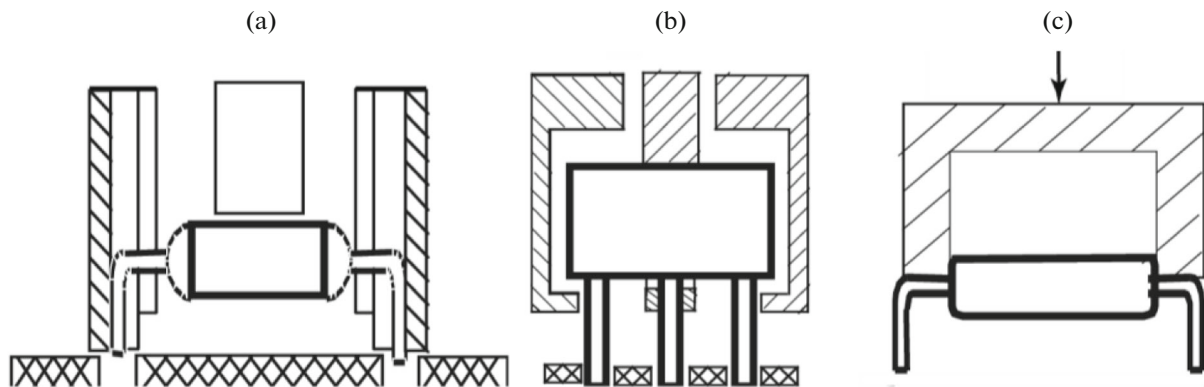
Component positioning options with assembly heads: (a) for two leads, (b) for three leads, and (c) by package.
